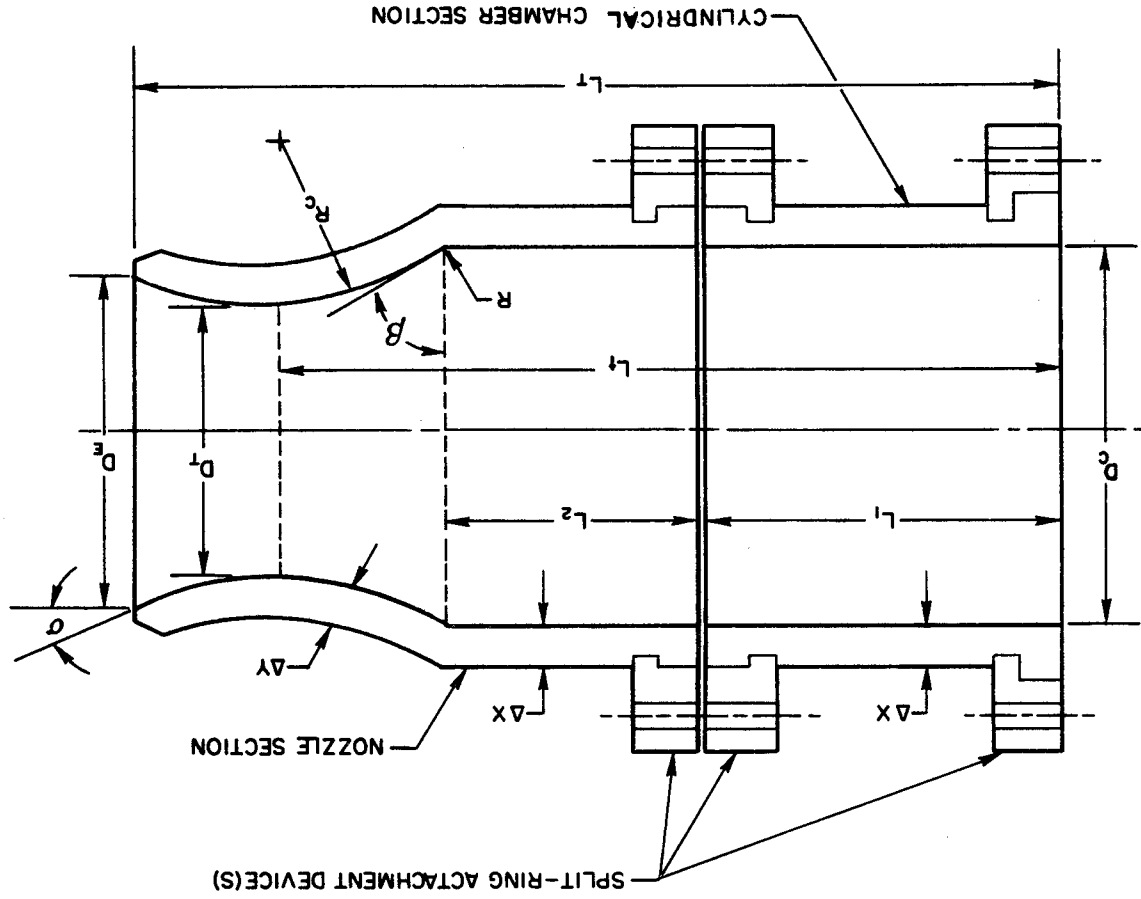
Schematic Representation of Reference ($L^* = 50$ Inches; $\epsilon_c = 2$) Chamber Assembly Showing Segmented Design and Dimensions
